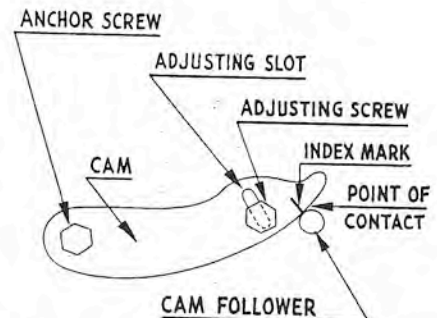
To synchronize the throttle linkage with magneto advance, index mark on cam must register with cam follower as throttle valve starts to open.
